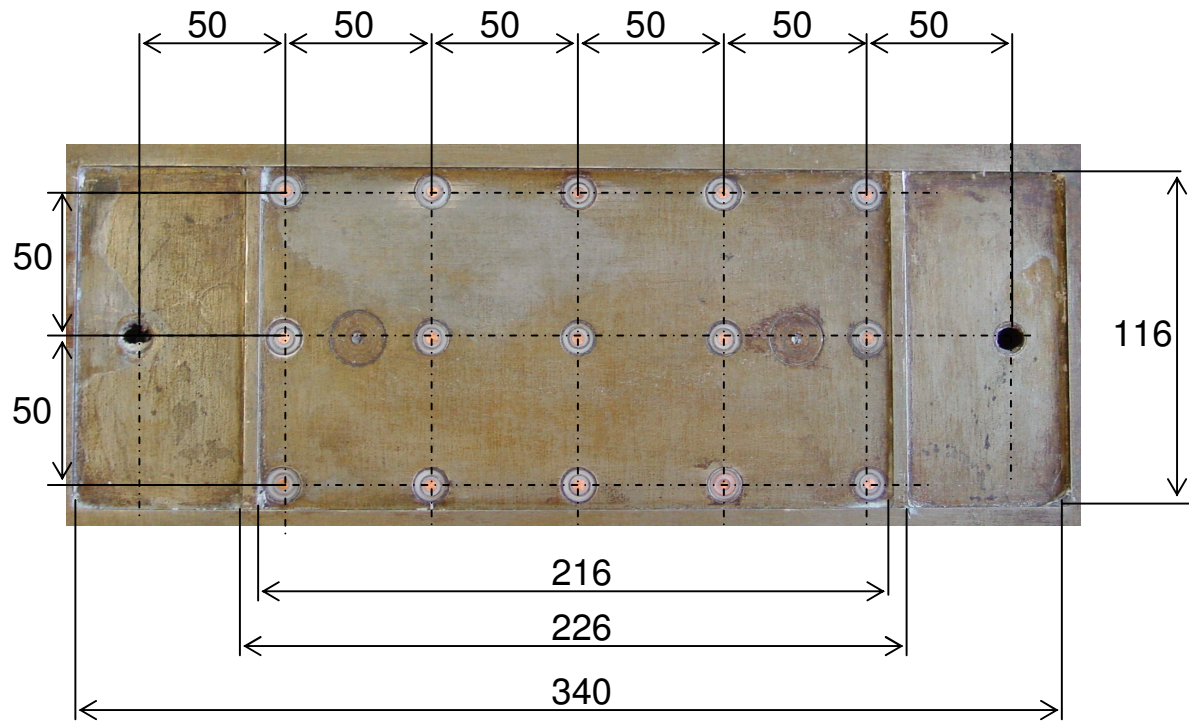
Top view of the mold with dimensions (in millimeters).
